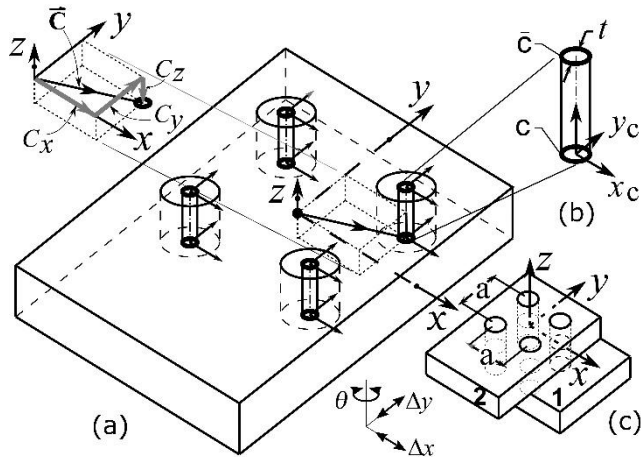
(a) pattern of four holes, their axis tolerance-zones, and eight constraint circles; (b) two constraint circles for one tolerance-zone; (c) assembled parts 1 and 2.
